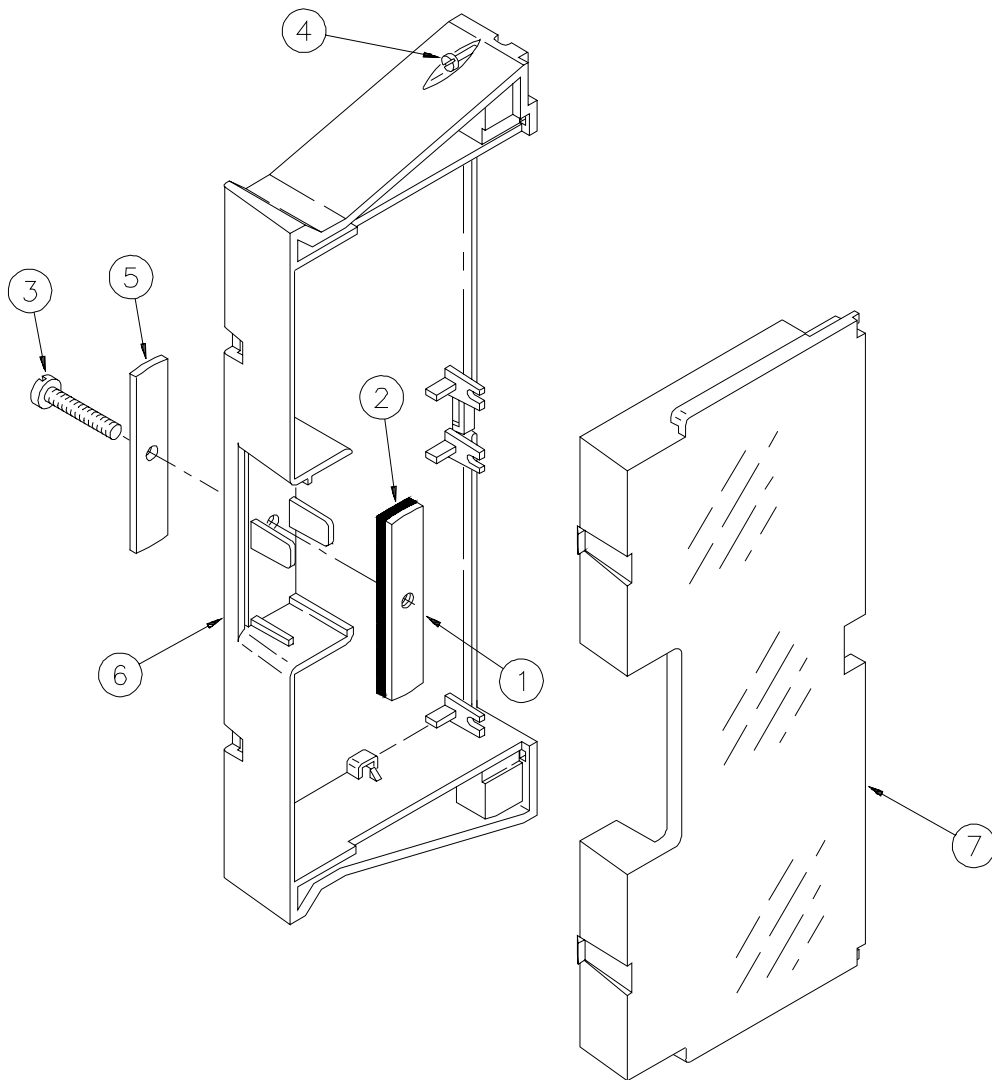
E1400-80011 Terminal Module Case Assembly
